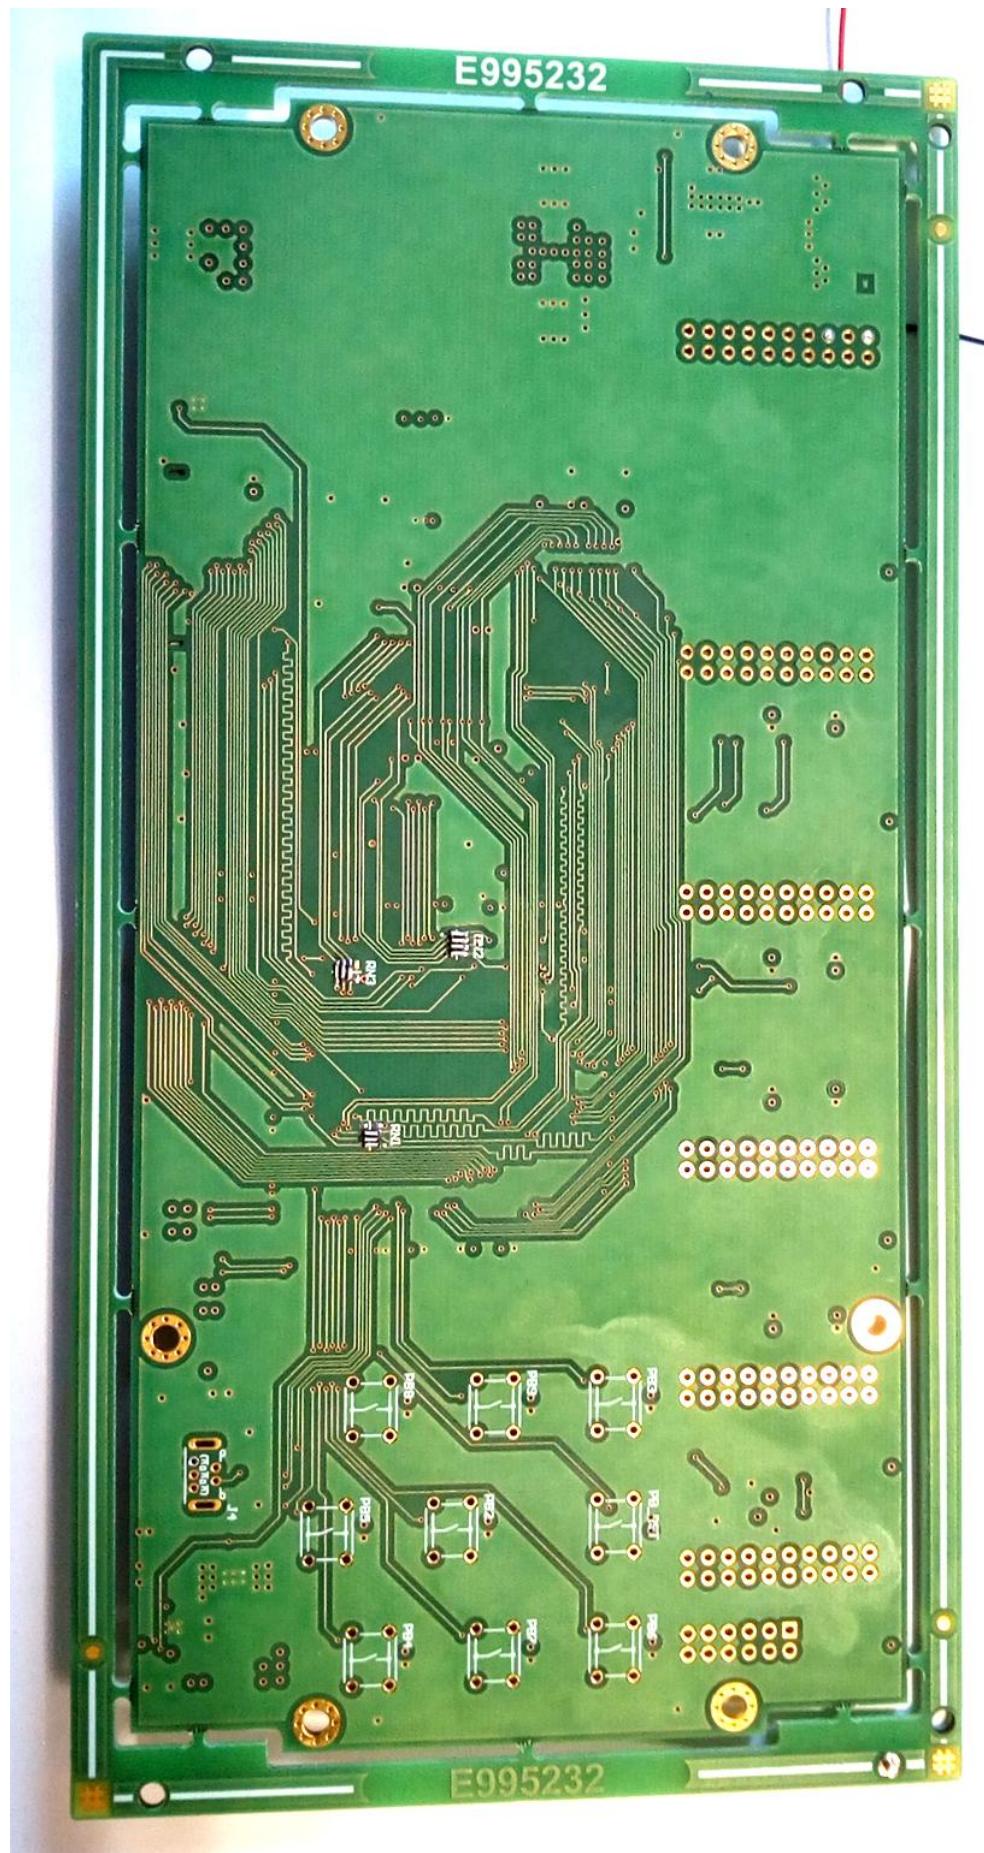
The motherboard PCB bottom view (after soldering) [100].
